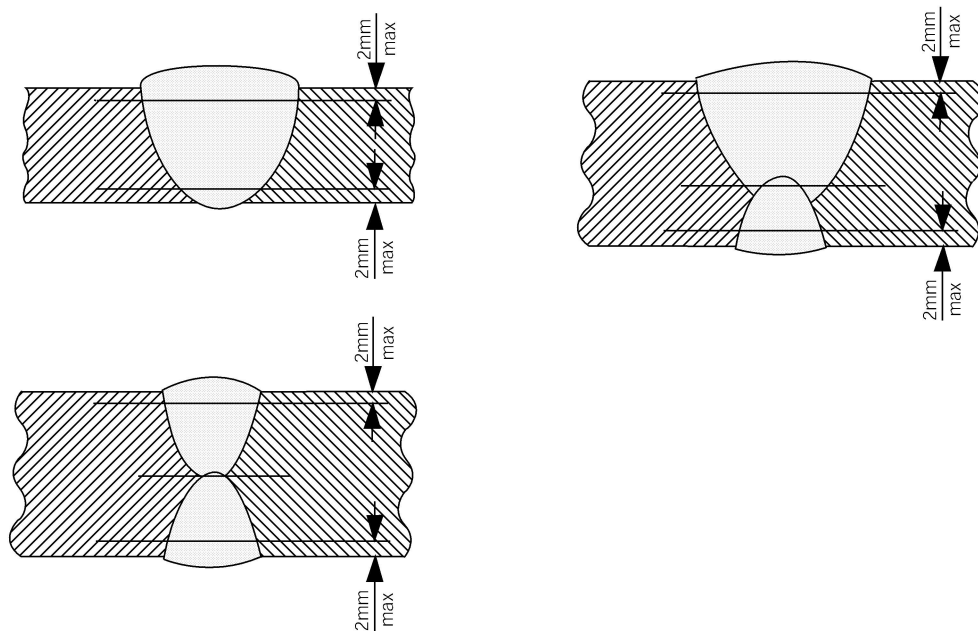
Examples of hardness test with rows of indentations (R) in butt welds
